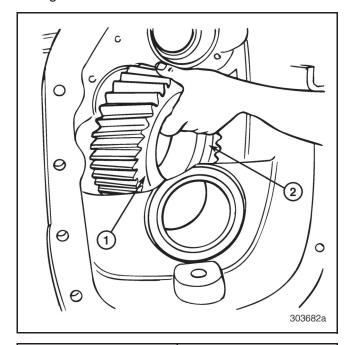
Installing Mainshaft/Countershaft Front Bearing Cover
